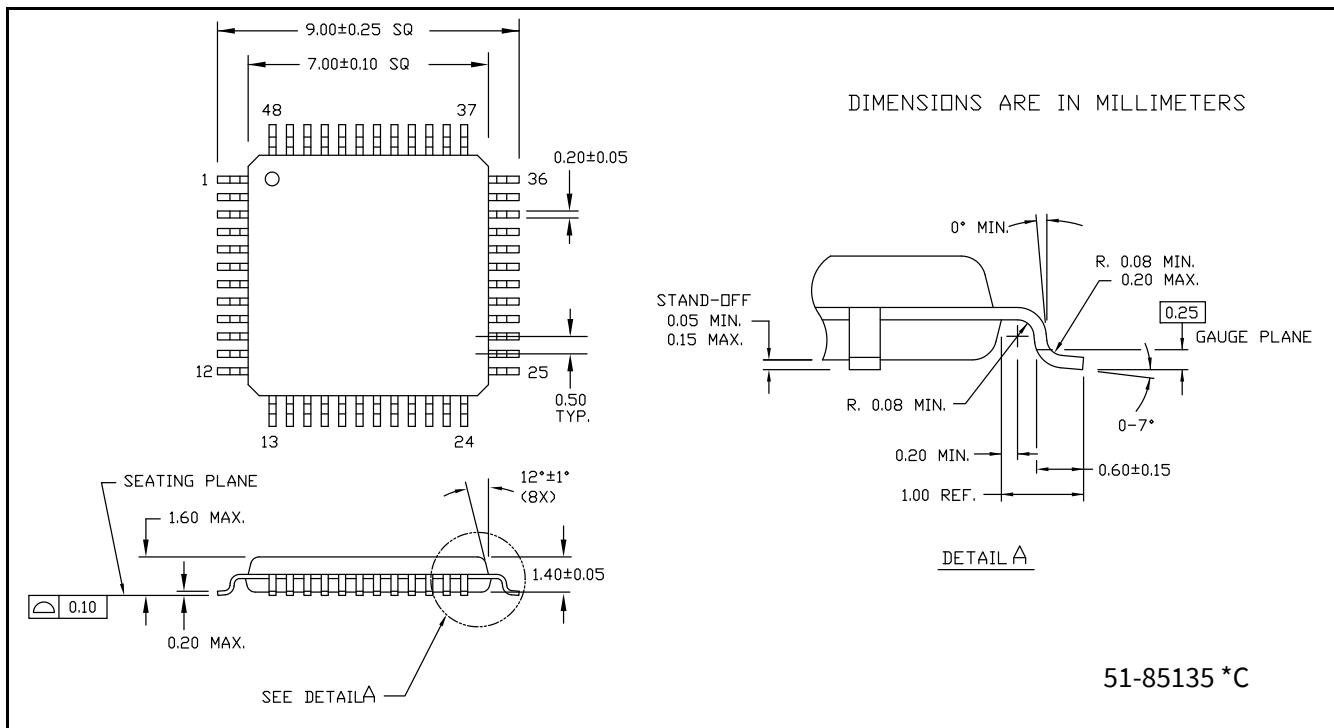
48-Pin 7 × 7 × 1.4-mm TQFP package (0.5-mm Pitch) outline
